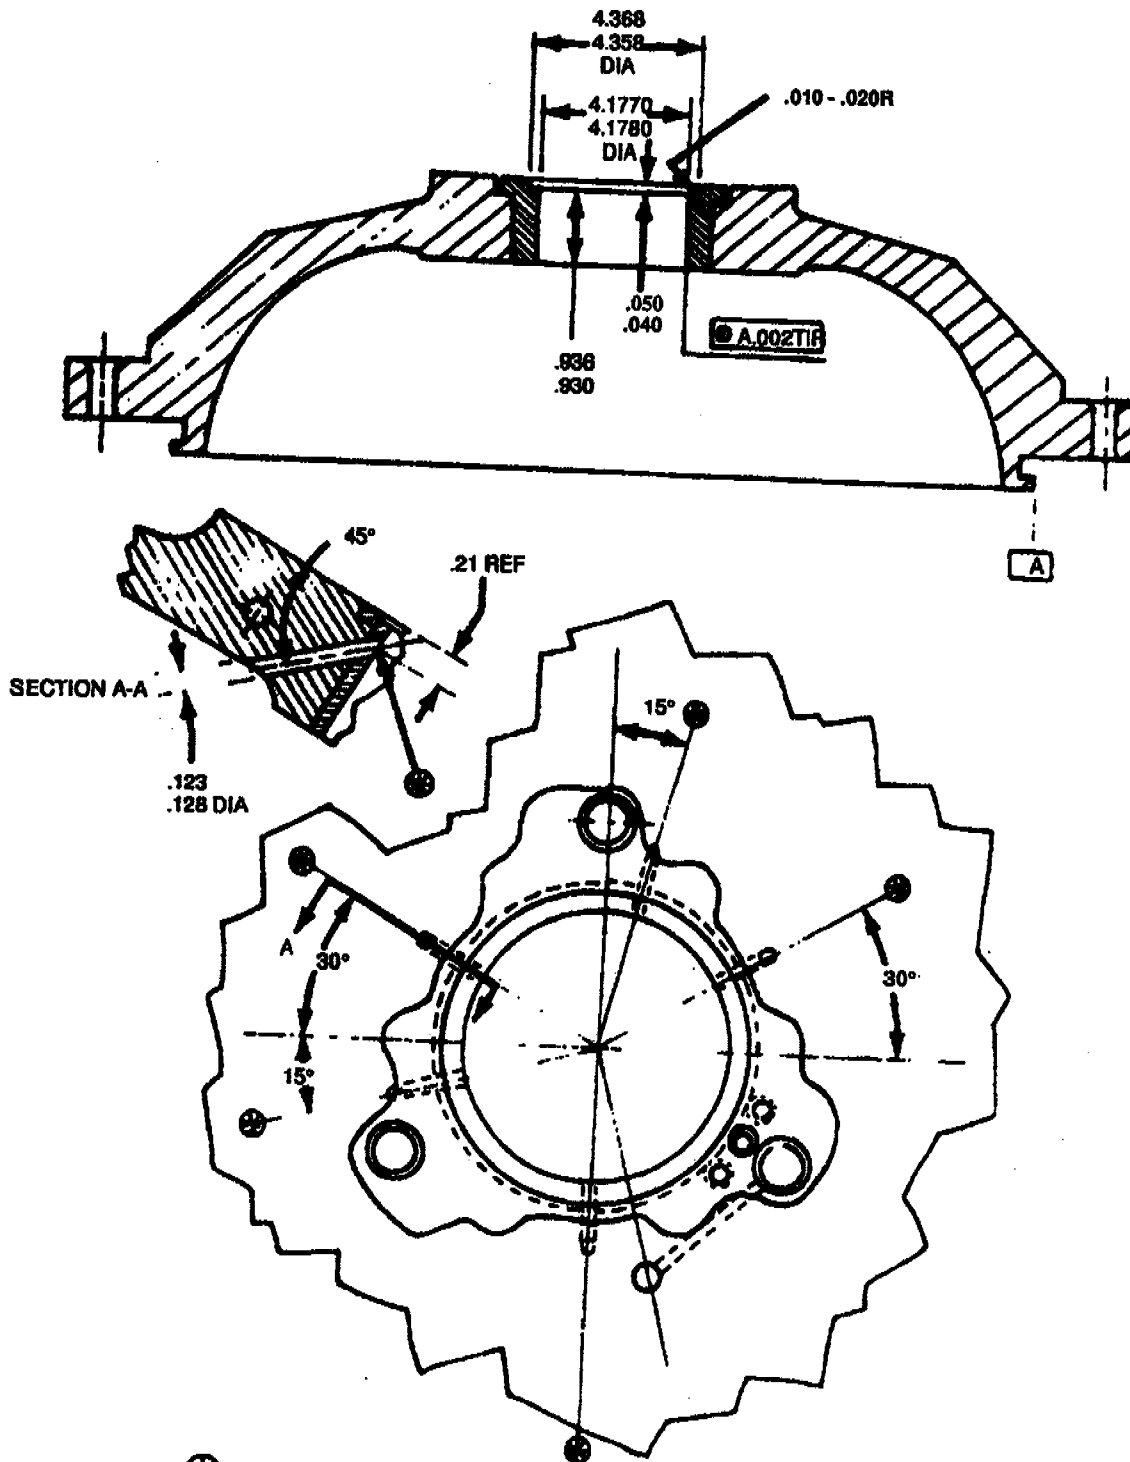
Housing Assembly, Front Cover (P/N 1-030-390-05) (Sheet 2 of 3).
